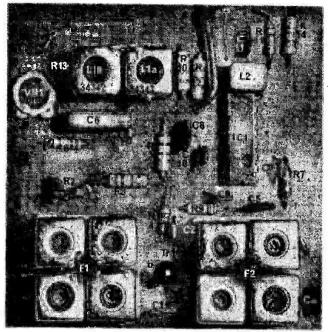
Layout of the components on the FM/IF Board. If a single tuned circuit is to be used instead of the double tuned circuit shown then a KACSK586HM should replace L1a.
